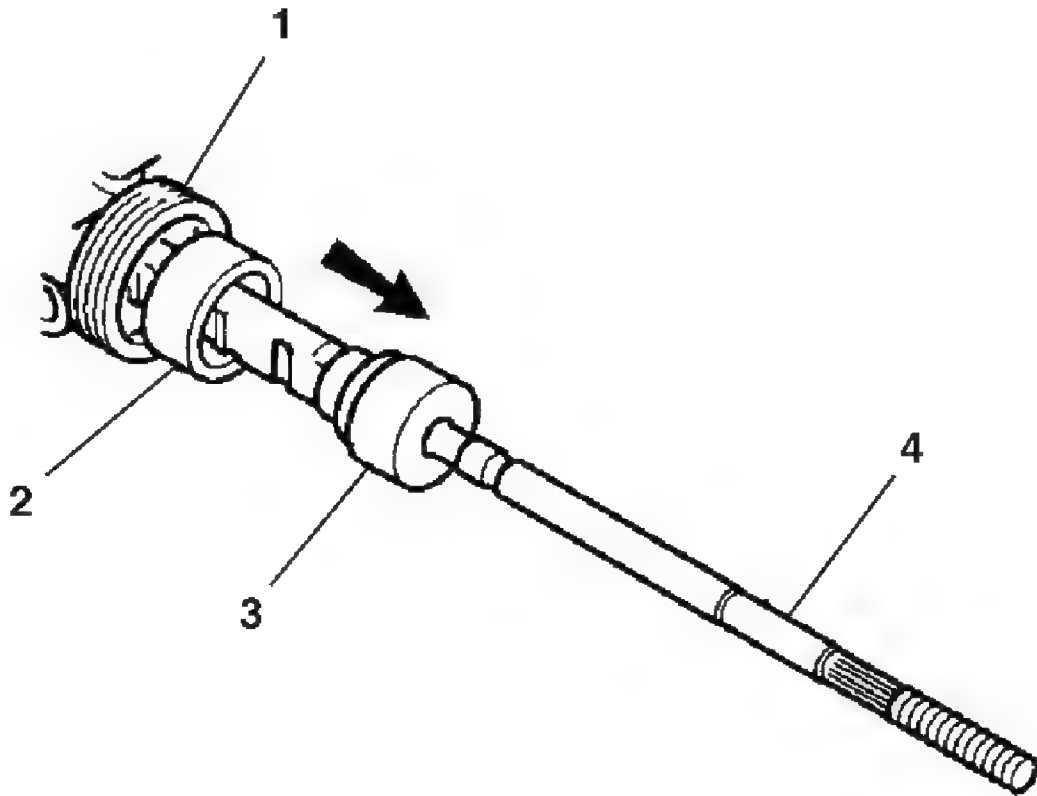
Identifying Shock Dampener & Inner Tie Rod Housing
